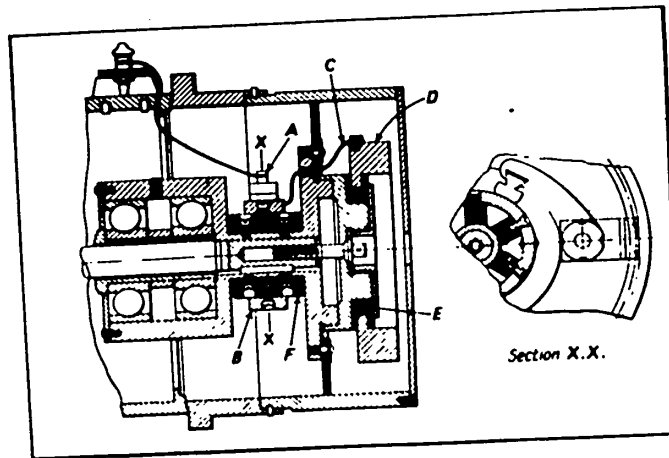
The Modified Spindle in the Experimental Machine (a Standard Grinding Machine). The current is supplied to the holder A and the ring B and is fed from there to the "grinding wheel" D. E and F are insulating wheels.
